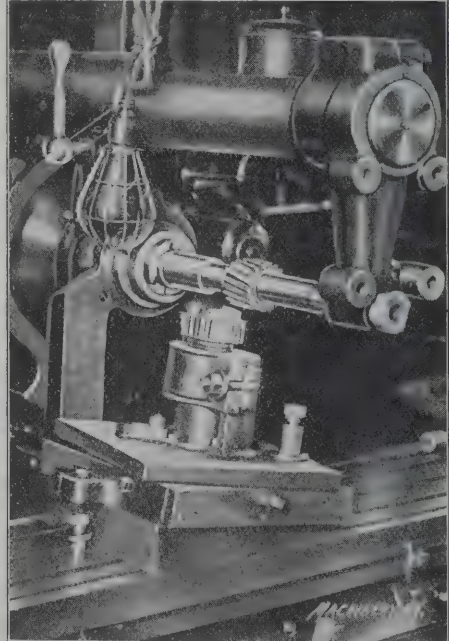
Milling the Clearance on the Clutch Teeth of a Drive-gear Sleeve
